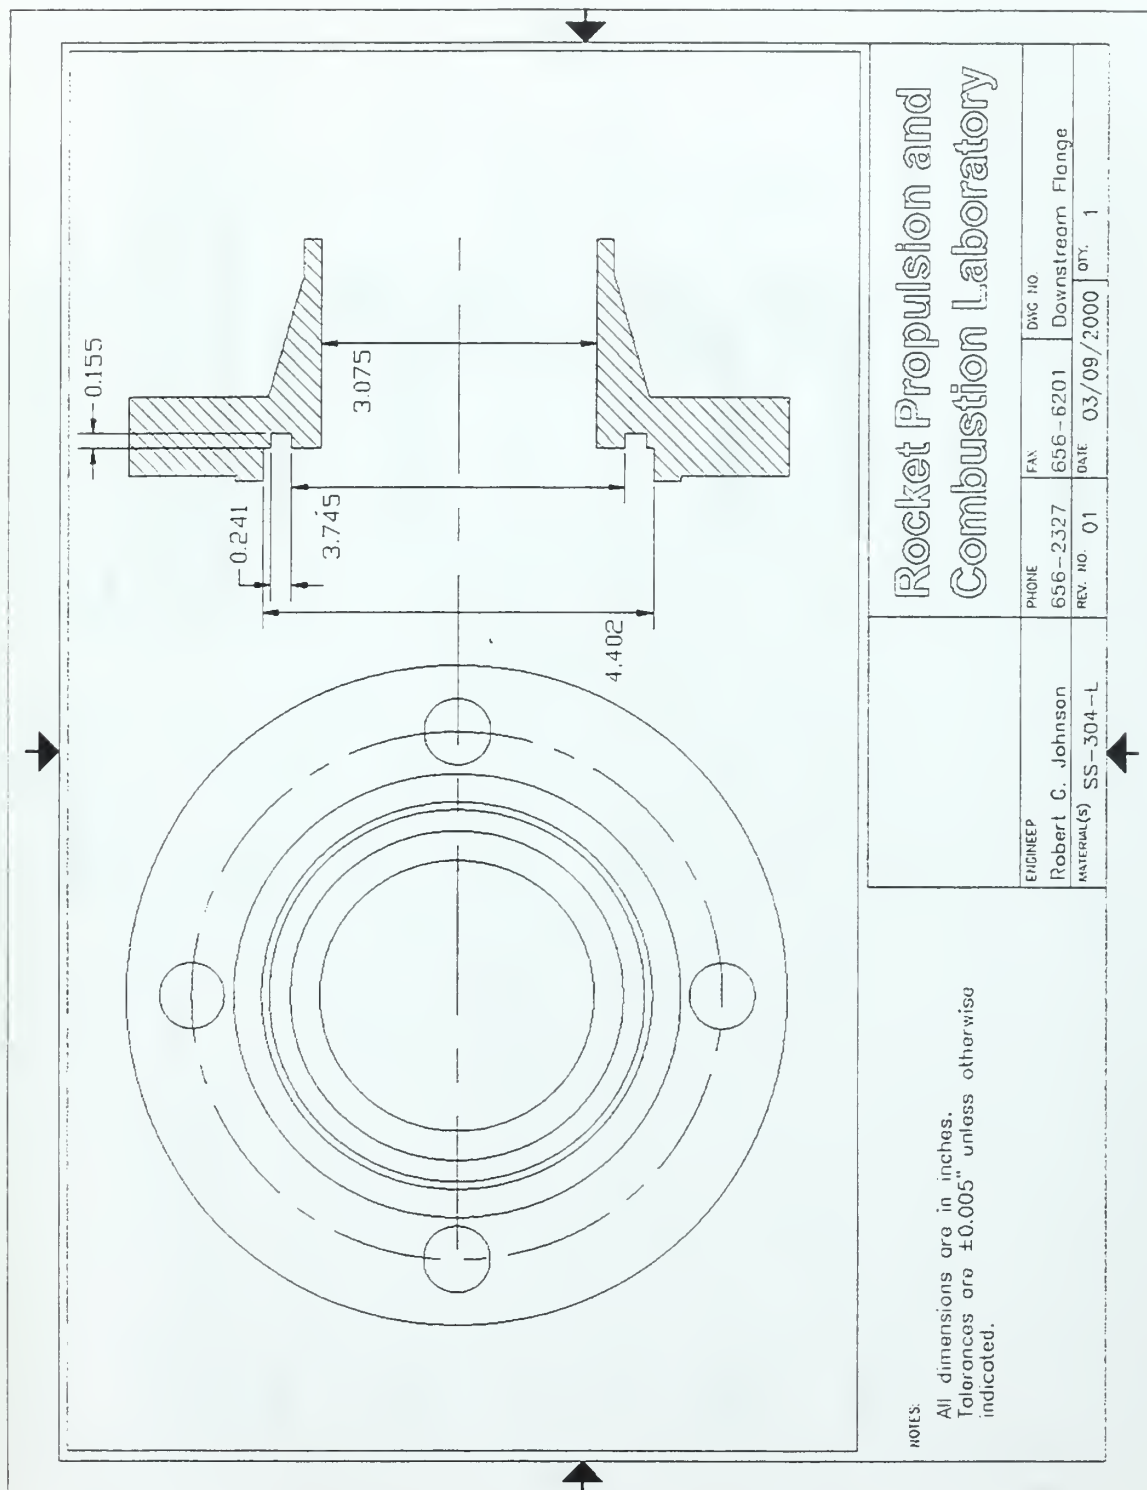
This flange was the downstream mount holding the Delaval choke in place just prior to the fuel injection manifold.
